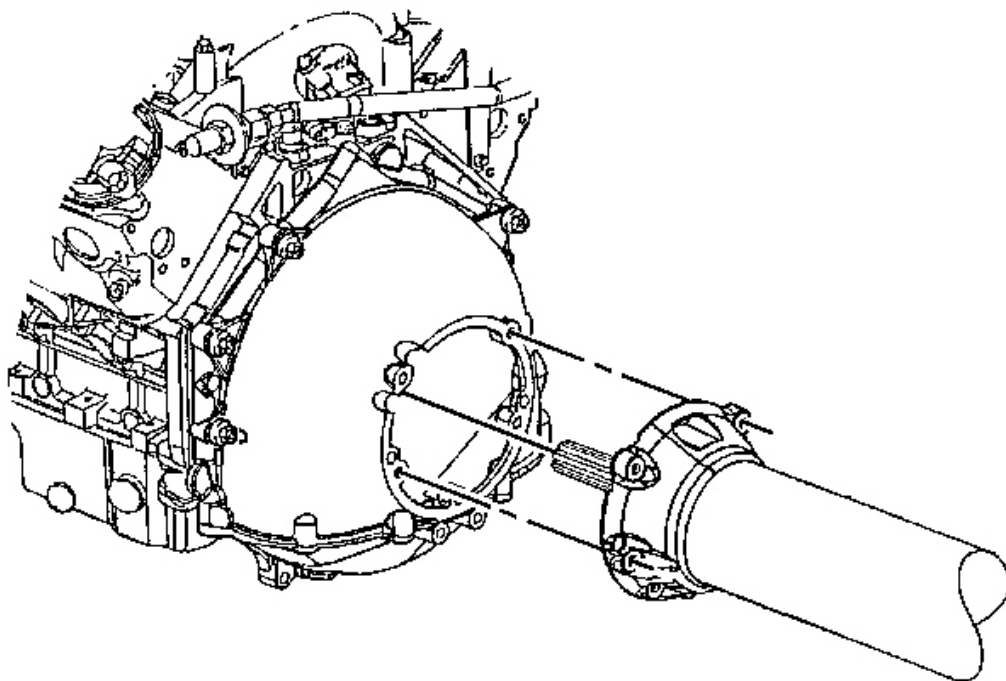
Propeller Input Shaft & Clutch Driven Plate Hub
